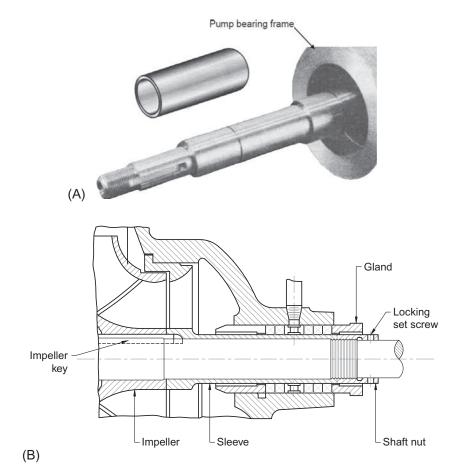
(A) Shaft/shaft sleeve components. (B) Sleeve with external lock nut and impeller key.
